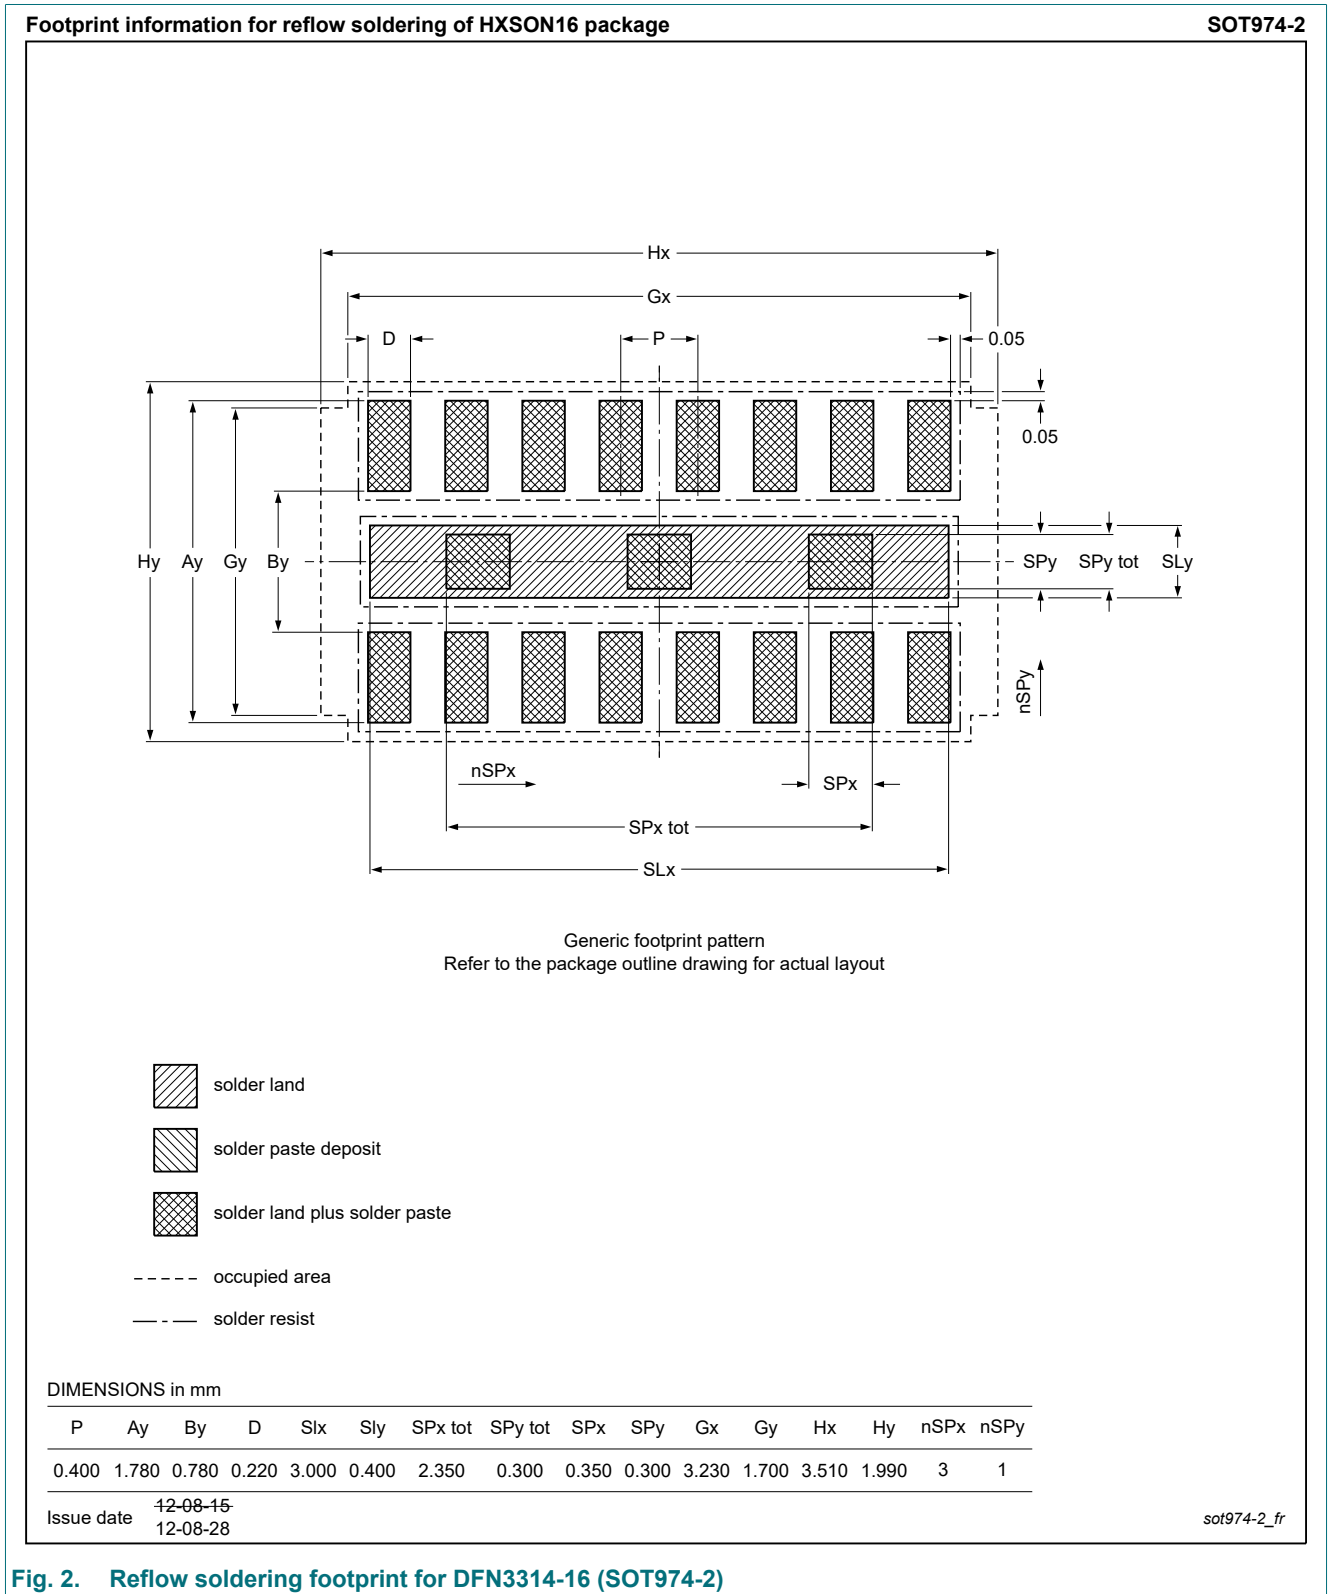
Reflow soldering footprint for DFN3314-16 (SOT974-2)
